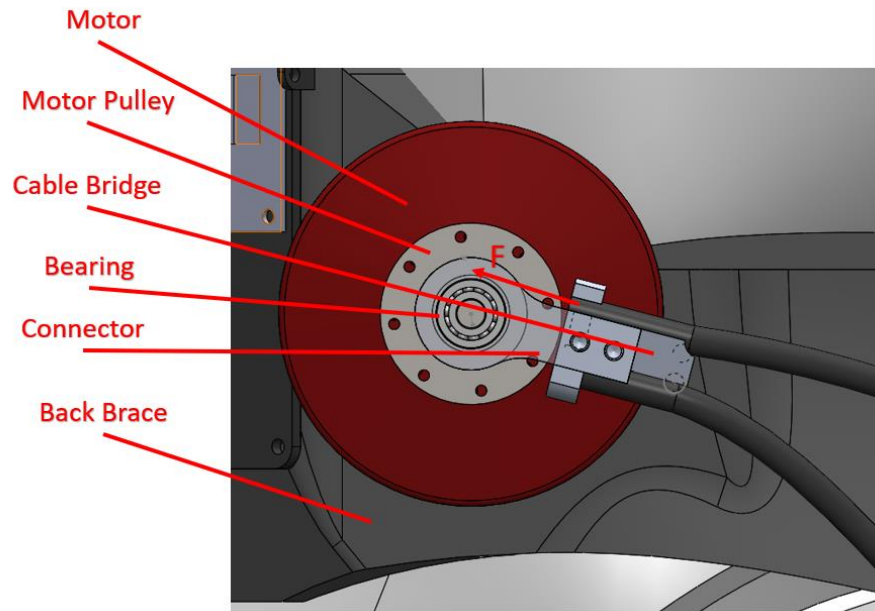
Mechanical components of the lower portion of the exoskeleton. The load being applied by the cable onto the cable mount is also shown, and is labeled  $F$ . The cables in the model end at the pulley bridge; however, in the real world they wrap around the pulley.
